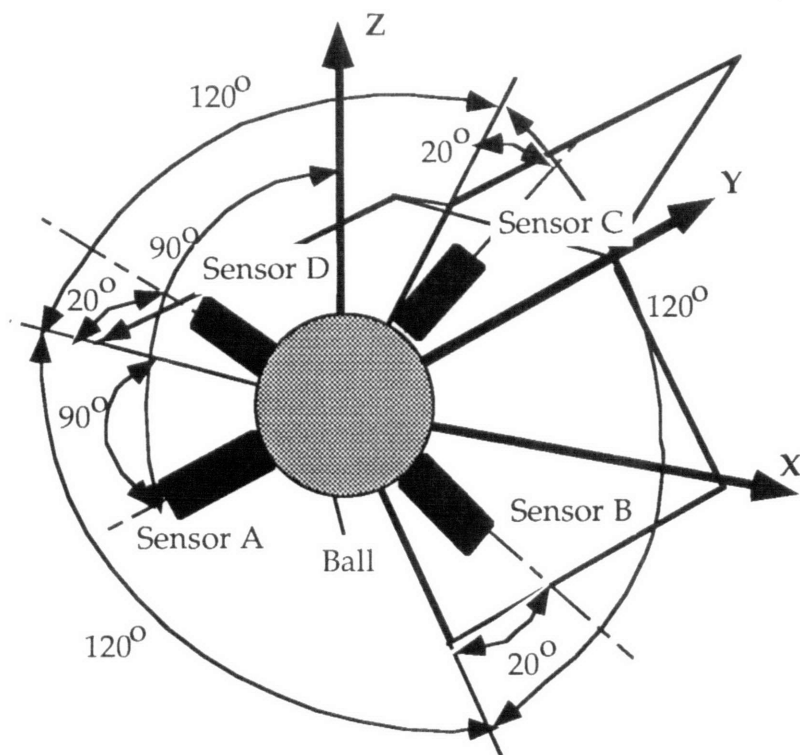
(b) Geometrical configuration of four force sensors inside ball joint.
